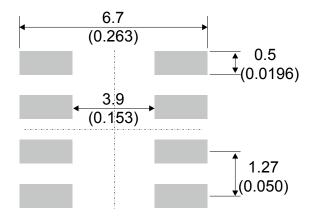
Footprint recommendation for improved clearance dimensions in mm (inches)
